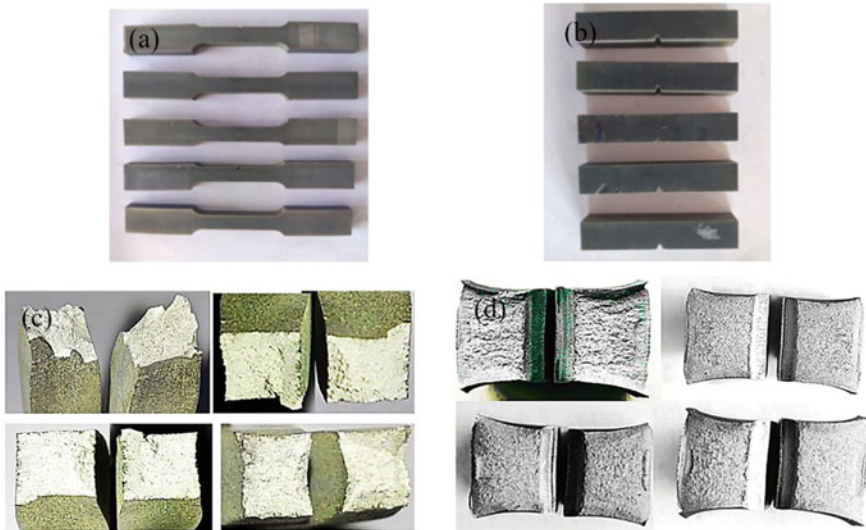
a, b The tensile samples and CVN impact samples had been prepared according to ASTM standard by EDM wire cutting machine, c the tensile macro-fractography (10×), d the impact macro-fractography (10×)
